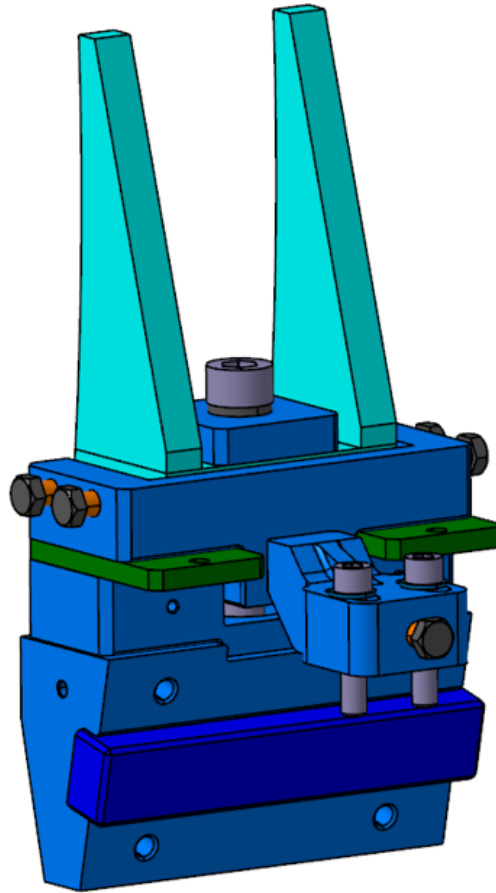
Cryostat-to-yoke fastening unit
